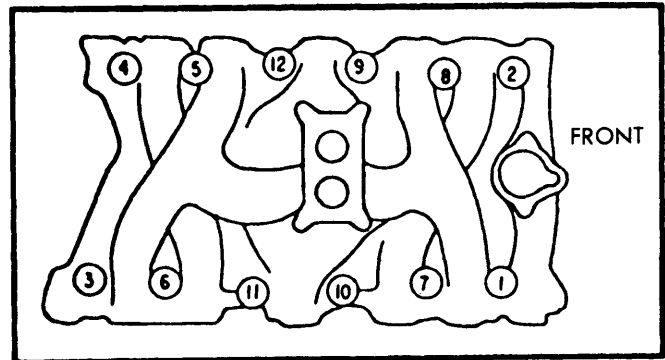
350" VIN R & Diesel Intake Manifold Tightening Sequence.
